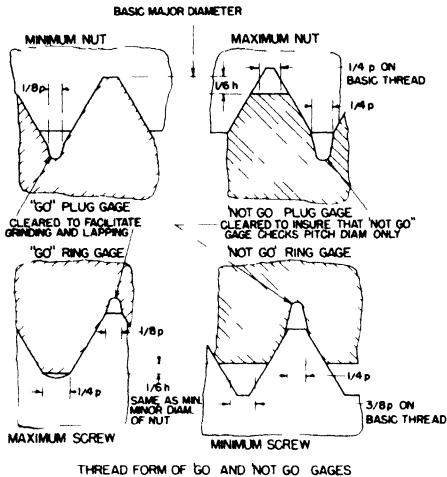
Thread form of "Go" and "Not Go" gages. The "Not Go" gage checks only the pitch diameter.
